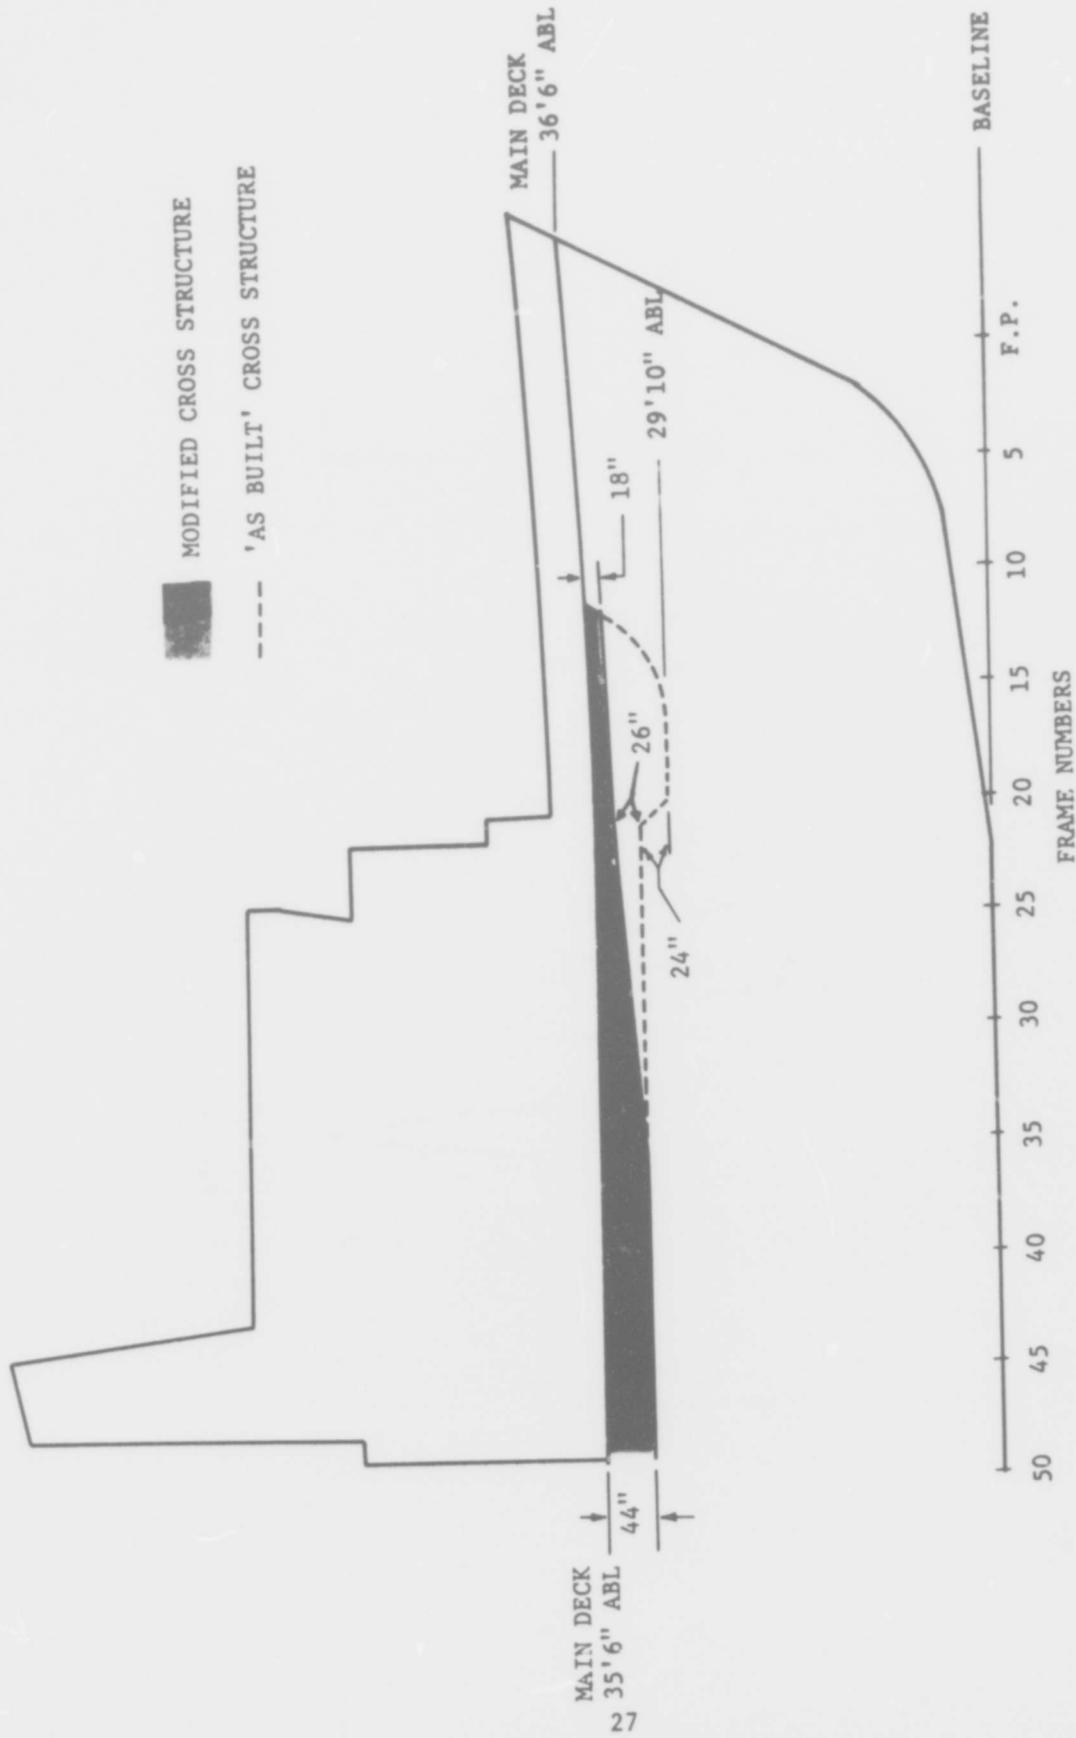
Sketch Showing Modified and 'As Built' Cross Structure
